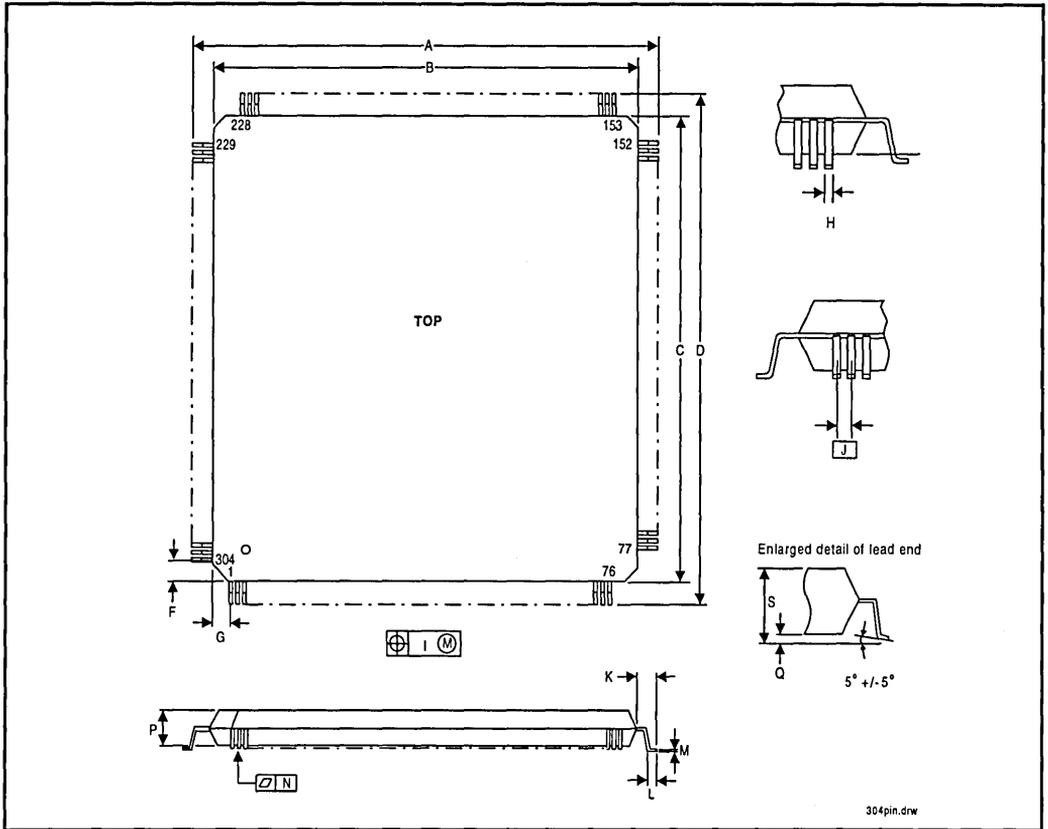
82454KX/GX PB Package Physical Dimensions (304-Pin QFP)
